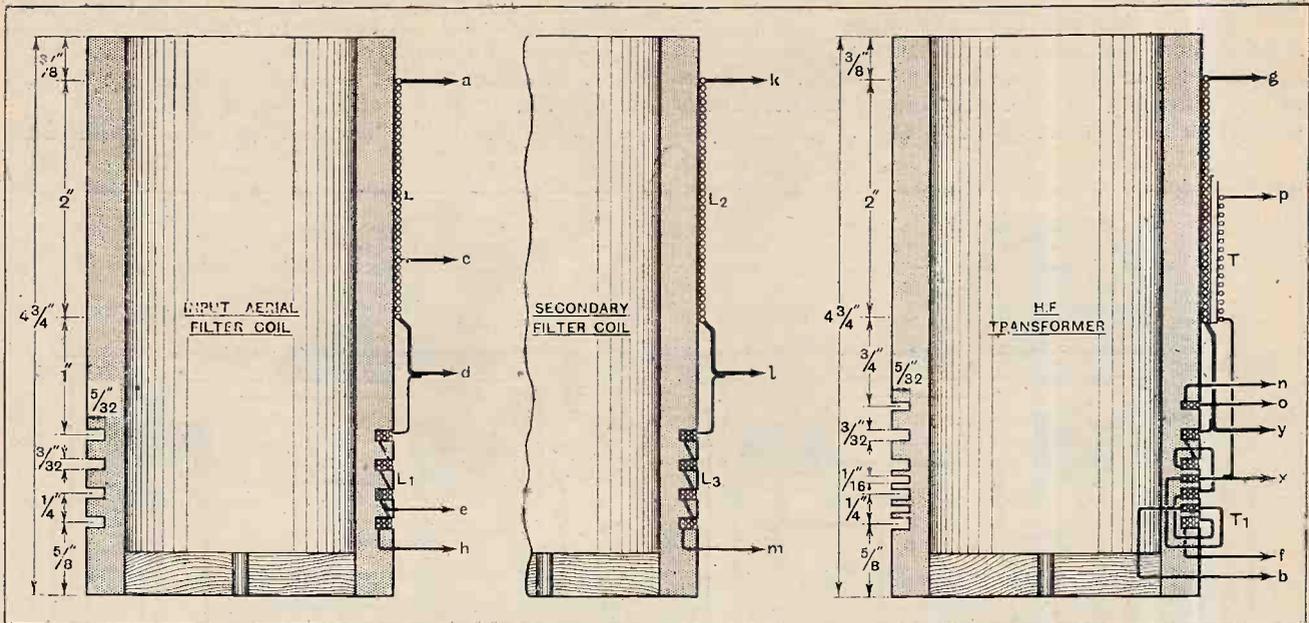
Preparation of the coil formers and details of windings. The two sets of filter coils are identical, except that the first is tapped.
